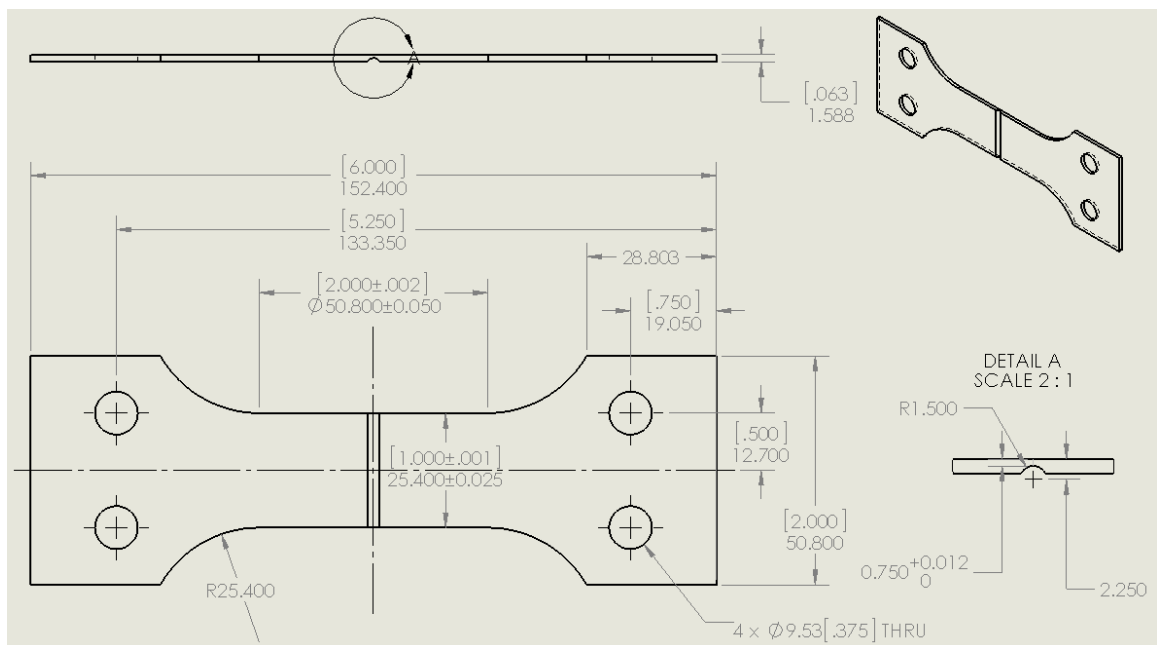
Technical drawing of the 1in-width specimen with semi-circular groove (Courtesy of James Gose).
